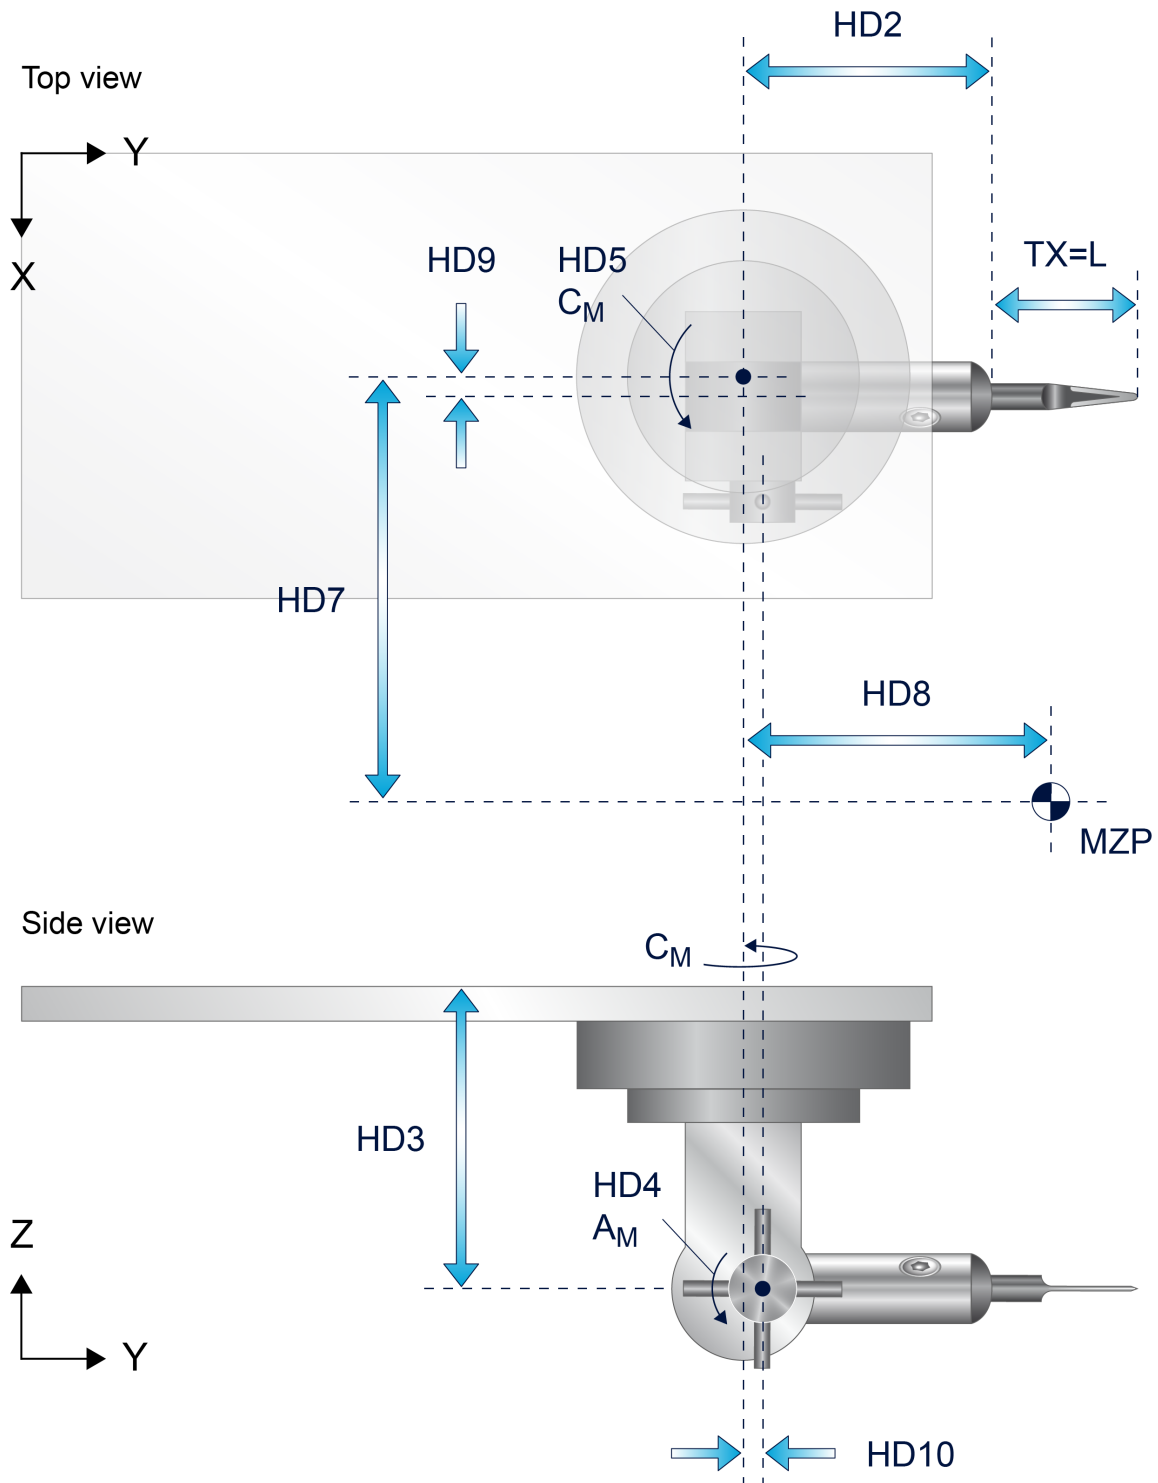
5-Axis metal cutting tool with 90 degree angle setting
